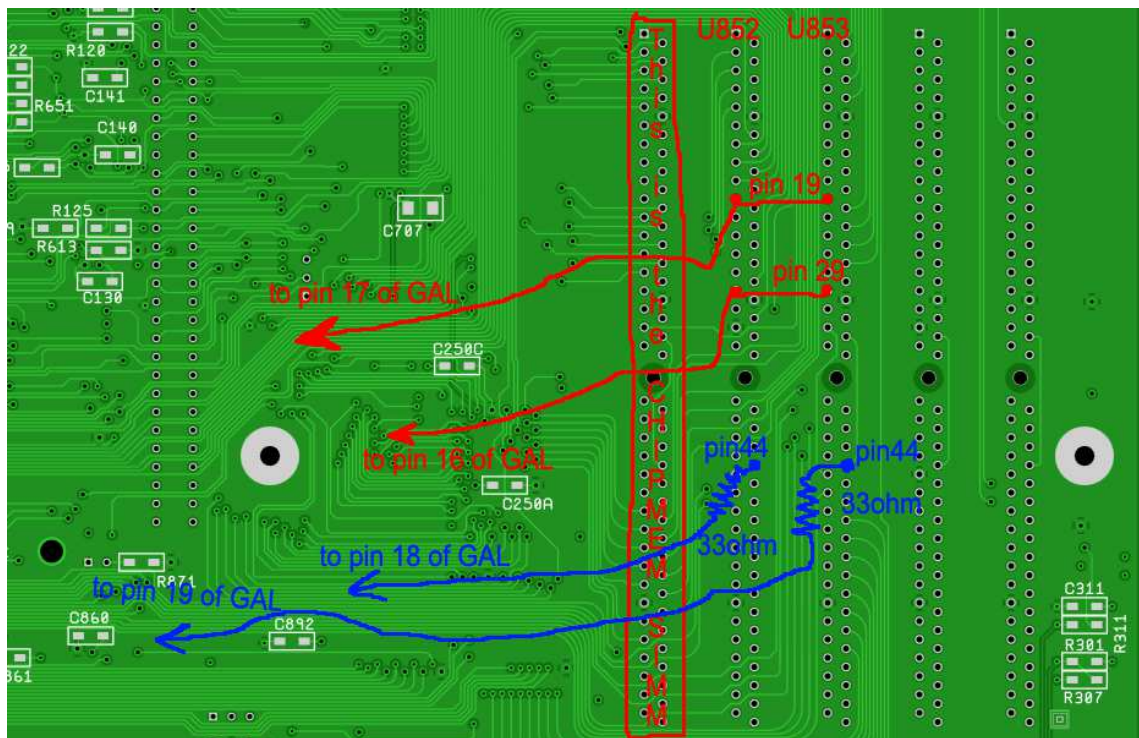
Simm connections. Blue drawings are optional as long as you solder cables&both 33ohm resistors to R891&R892. Just in case you want to use shorter cables.
